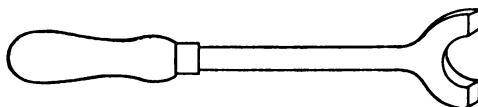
MOULDING TOOL FOR HEAVY VERTICAL WELDING.
